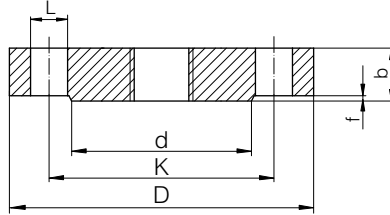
Dimensions - DIN flange DIN 2501 (seal ledge DIN 2526 Form C)
